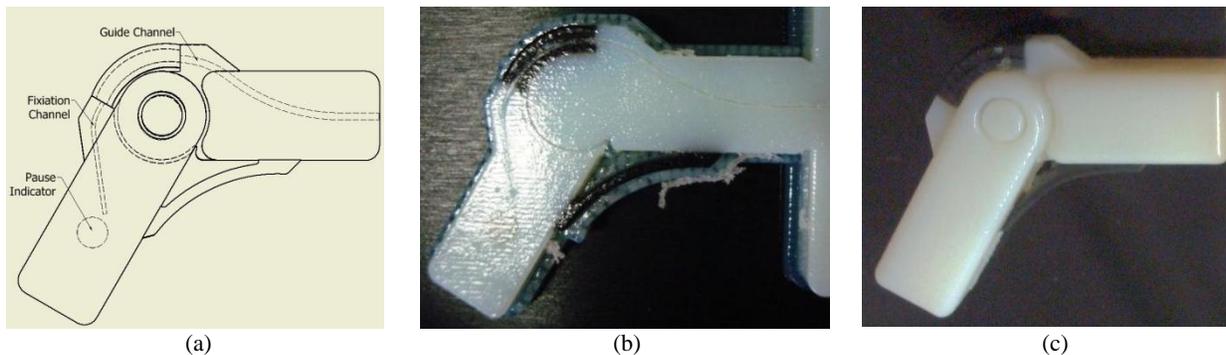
(a) CAD representation of knee, (b) in-situ embedding, (c) finished part
